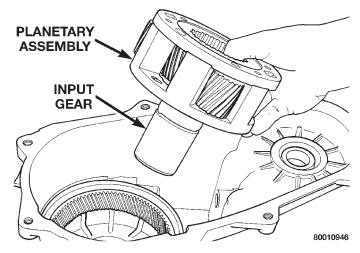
Input Gear And Planetary Carrier Removal INPUT AND LOW RANGE GEAR DISASSEMBLY
